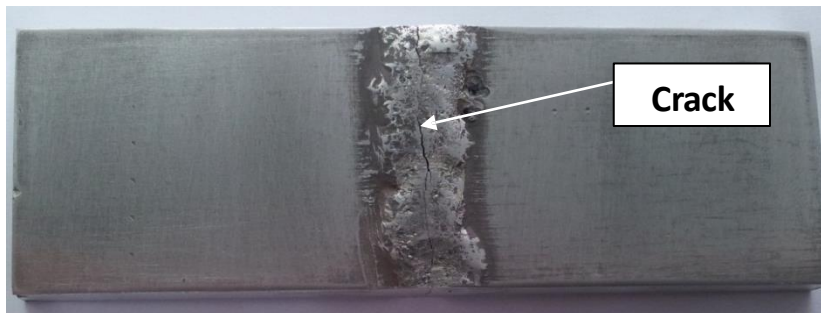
TIG (Tungsten Inert Gas) welding for alloy 7075-T651.
